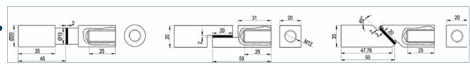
Continuum-mechanics specimen with dimensions in mm (from left to right: tensile butt joint specimen, lap-shear specimen, diagonal tensile specimen).
